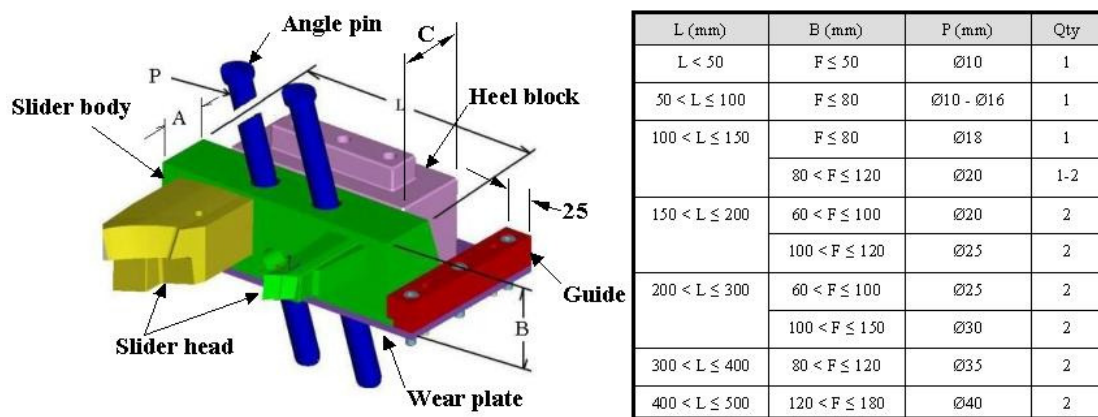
Dimensional design rules of a slider assembly (Courtesy: Luen Shing Tools Limited)
